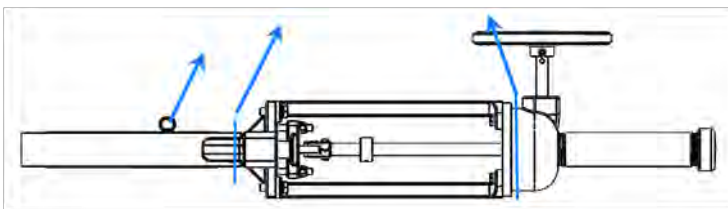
Knife Gate Valve with Bevel Gear Actuator, Horizontal Lifting
